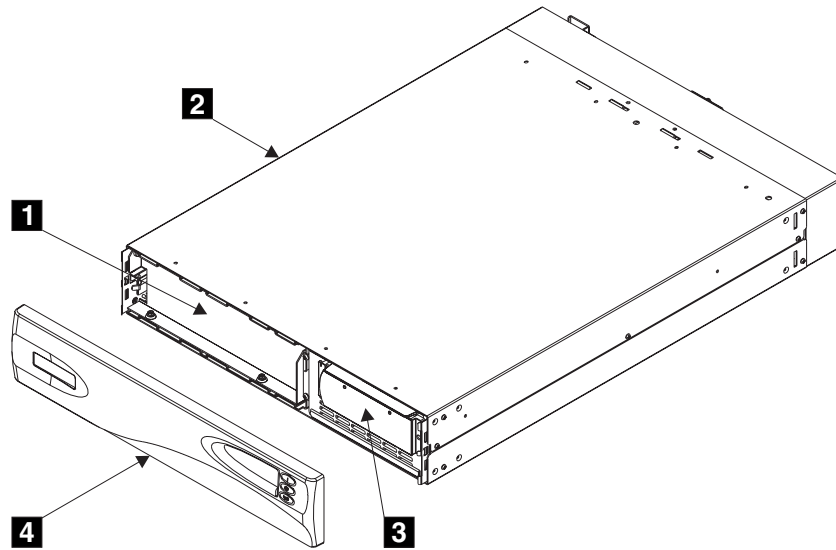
Exploded view of the 2145 uninterruptible power supply hardware
